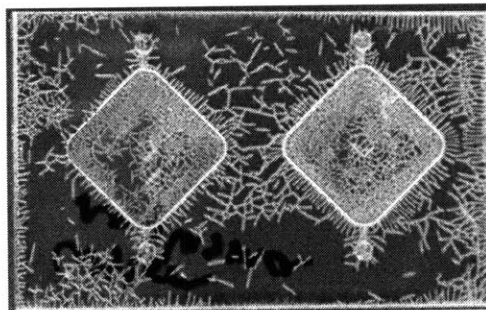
Silane coating immediately after polycarbonate vapor polishing. Stress cracks are noticeable on the piece and occur in higher density around machined edges and surfaces.
